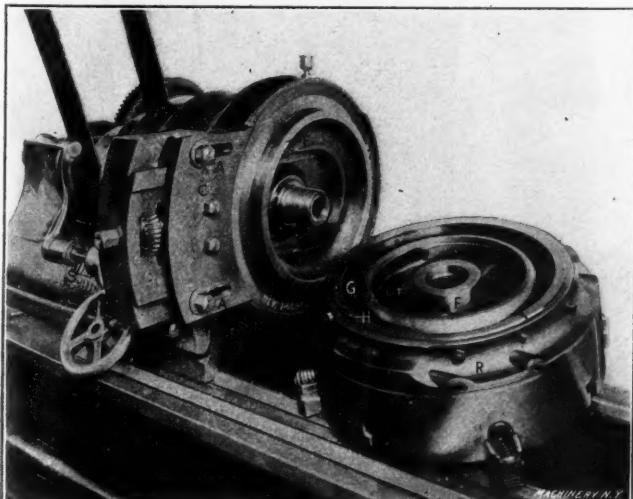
View showing Chuck removed and Adjustable Slide for Varying the Ellipses
